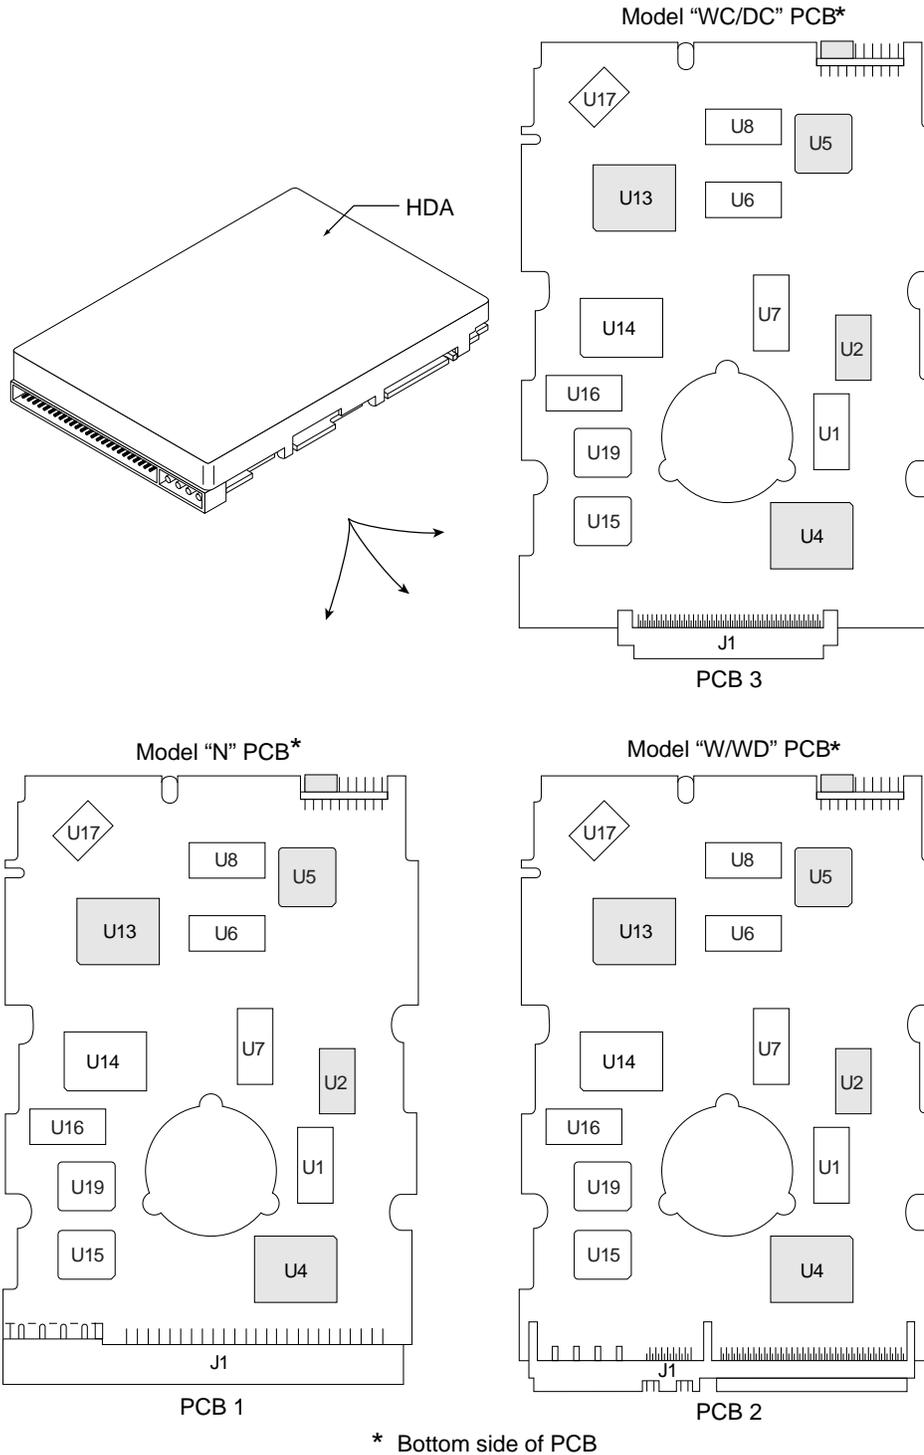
Locations of printed circuit board (PCB) components listed in Table 3
